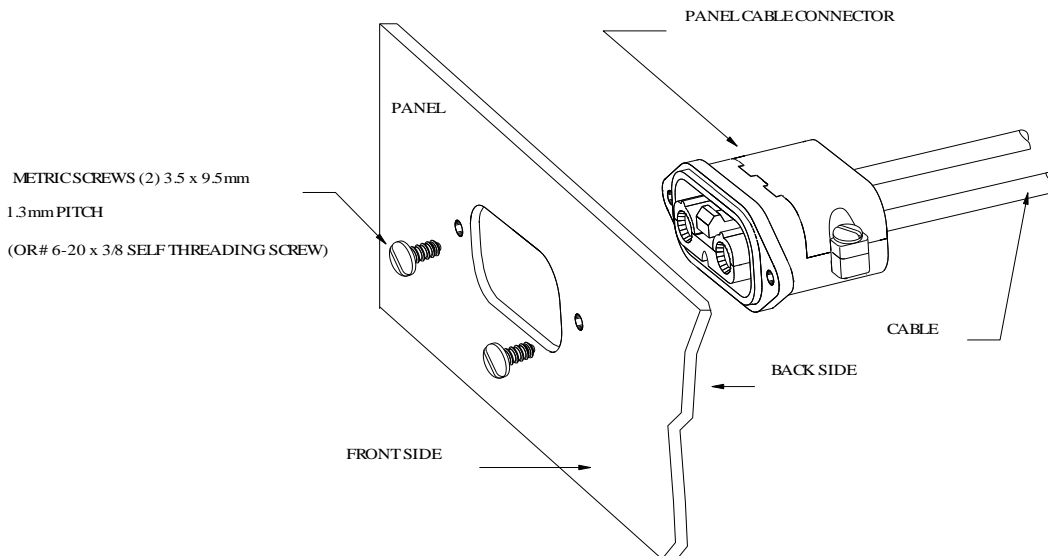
PANEL CABLE CONNECTOR ASSEMBLY
